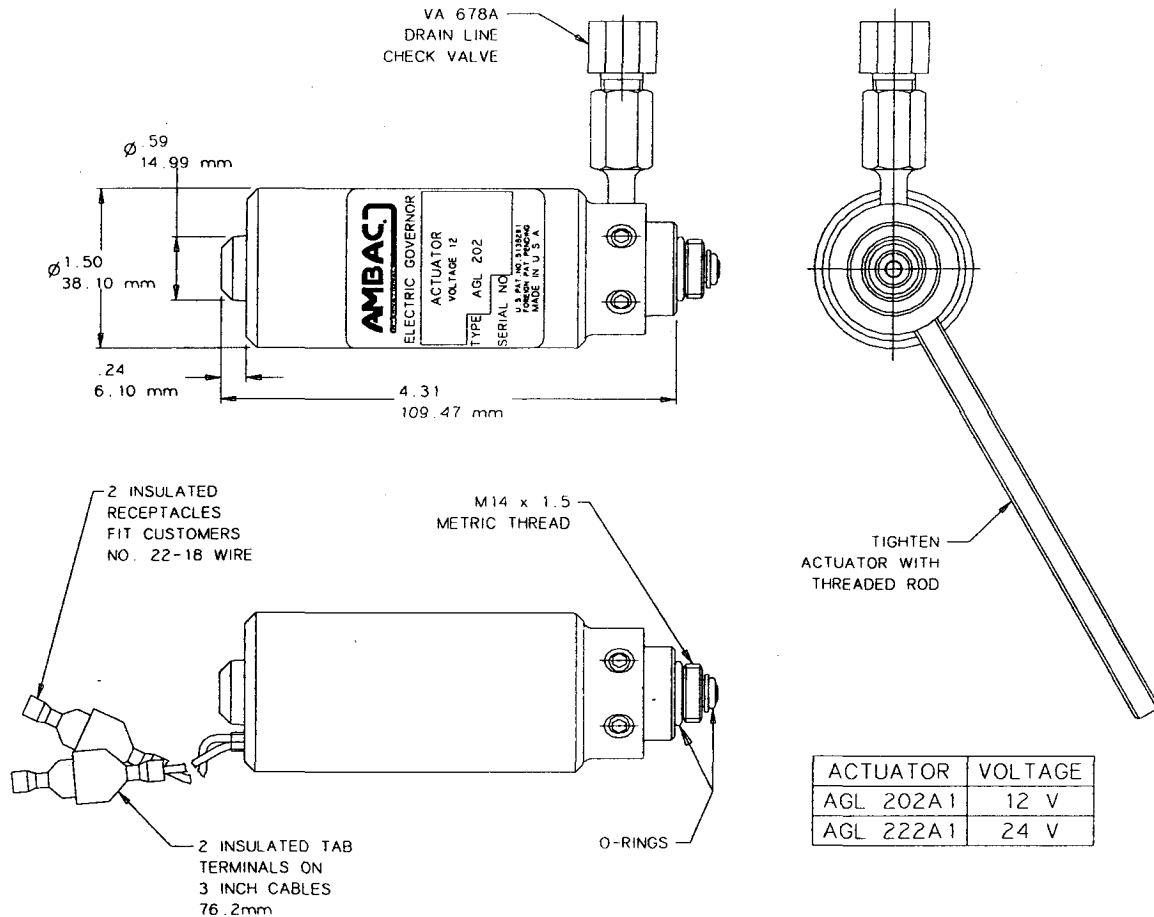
AGL 202 and AGL 222 Actuator Dimensions
